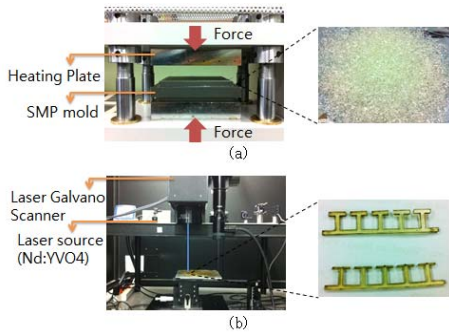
Manufacturing process for SMP rivet (a) Molding SMP plate with a heating press machine (b) Cutting SMP plate into rivet shape with a laser machine
